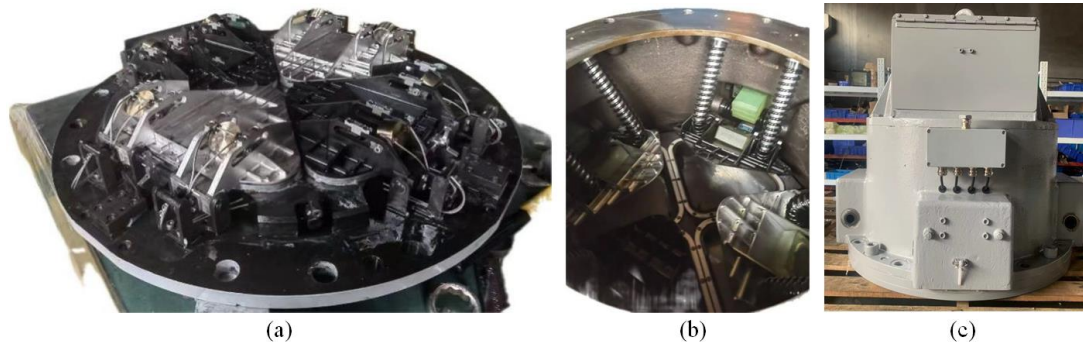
Prototype of the new valve with its key components (a) flange and closed disks, (b) opened disks and (c) valve assembly
